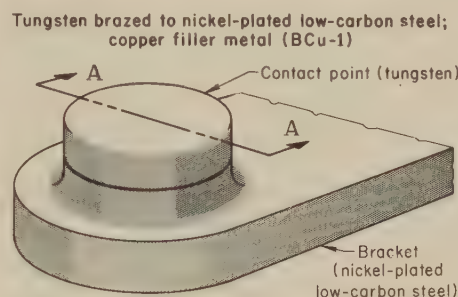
Distributor-point assembly for which collar used for locating components during brazing was made of ceramic for resistance to wetting by filler metal (Example 556)
